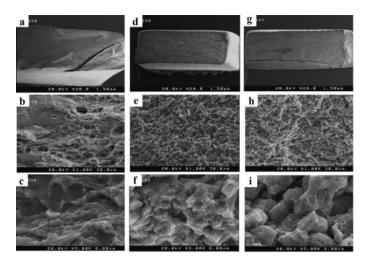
(a) Fracture surface of tensile specimen that created with cylindrical pin; (b),(c) Higher magnification; (d) SEM image of the fracture surface that generated by square pin;(e),(f) Higher magnification; (g) SEM fractographs of tensile tested specimen that formed with triangle pin; (h),(i) Higher magnification.
